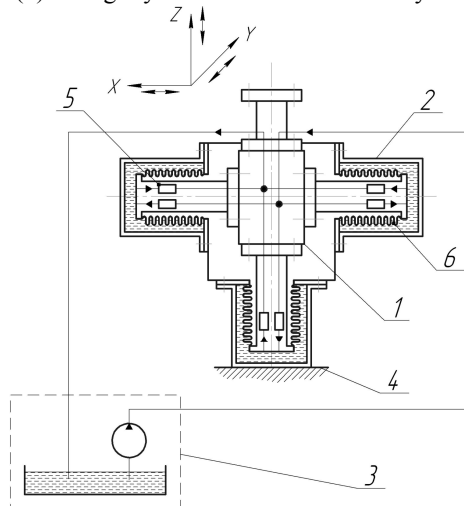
The MR module scheme: 1 - moving rod, 2 – hydraulic cylinder, 3 - pump, 4 - base 5 – MR valve, 6 - bellow unit
